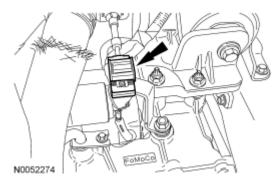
Locating Upper Evaporative Emissions (EVAP) Tube Quick Connect Coupling Courtesy of FORD MOTOR CO.
